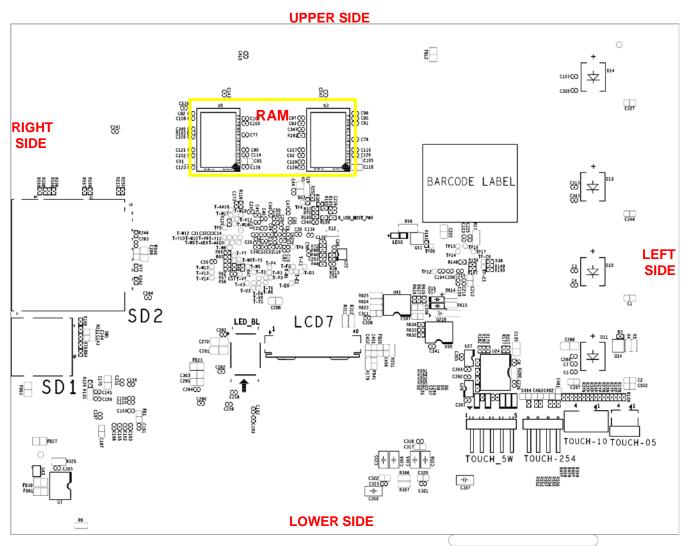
Topology of the Board (BOTTOM). Lower Side is the Connector Area.
